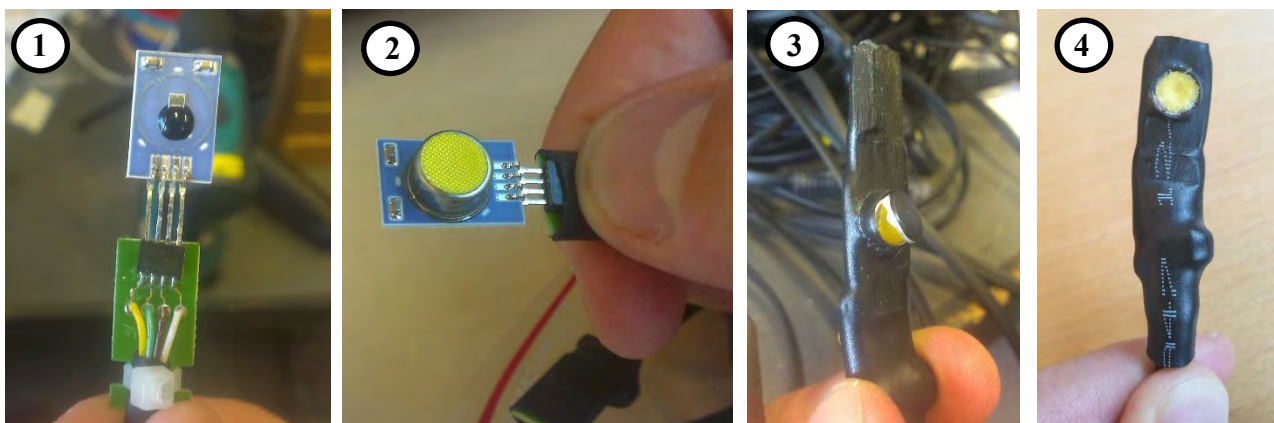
Sensor production. 1) Before adhesive shrink tubing 1. 2) Before adhesive shrink tubing 2. 3) After adhesive shrink tubing. 4) After adhesive shrink tubing, with tubing removed at the sensing area.
